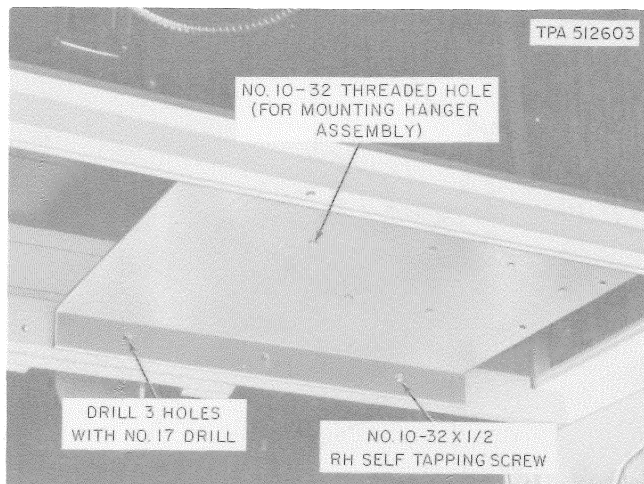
Installation of KS-19267, List 14 Mounting Bracket
